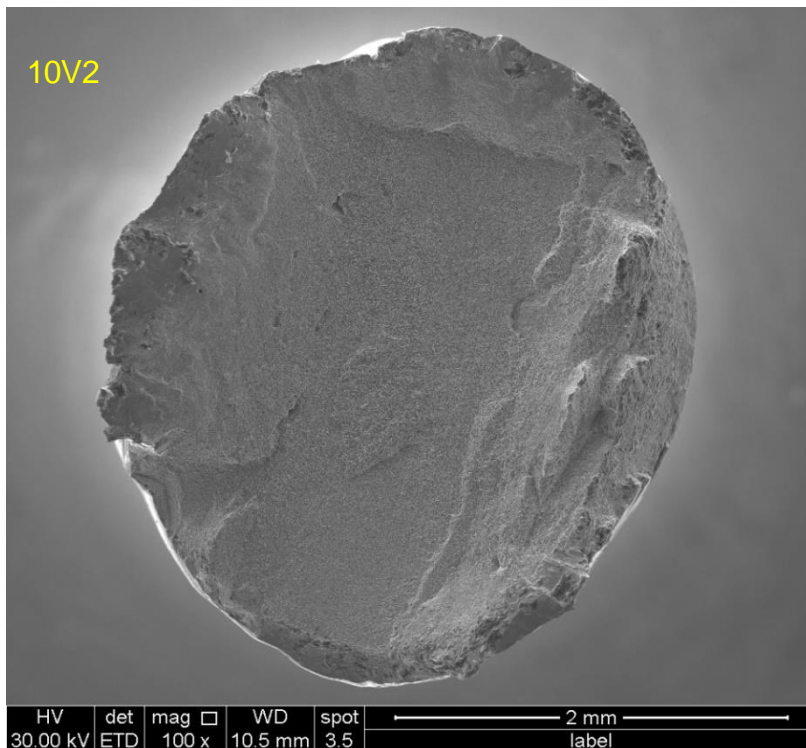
Secondary electron SEM image of the fracture surface of tensile specimen V2 from set 10 large. This vertical fracture surface is rough and jagged but flatter towards the centre than the previously shown Horizontal tensile specimen fracture surface.
